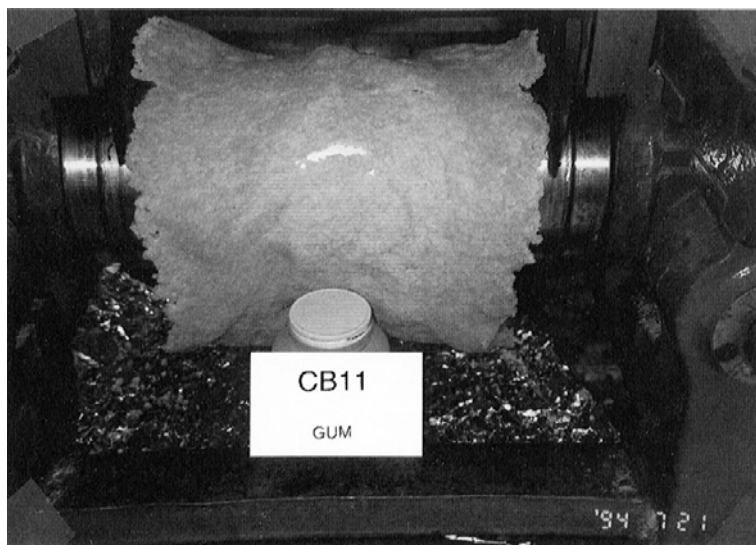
a) Photograph of CB11 gum rubber on the mill.
